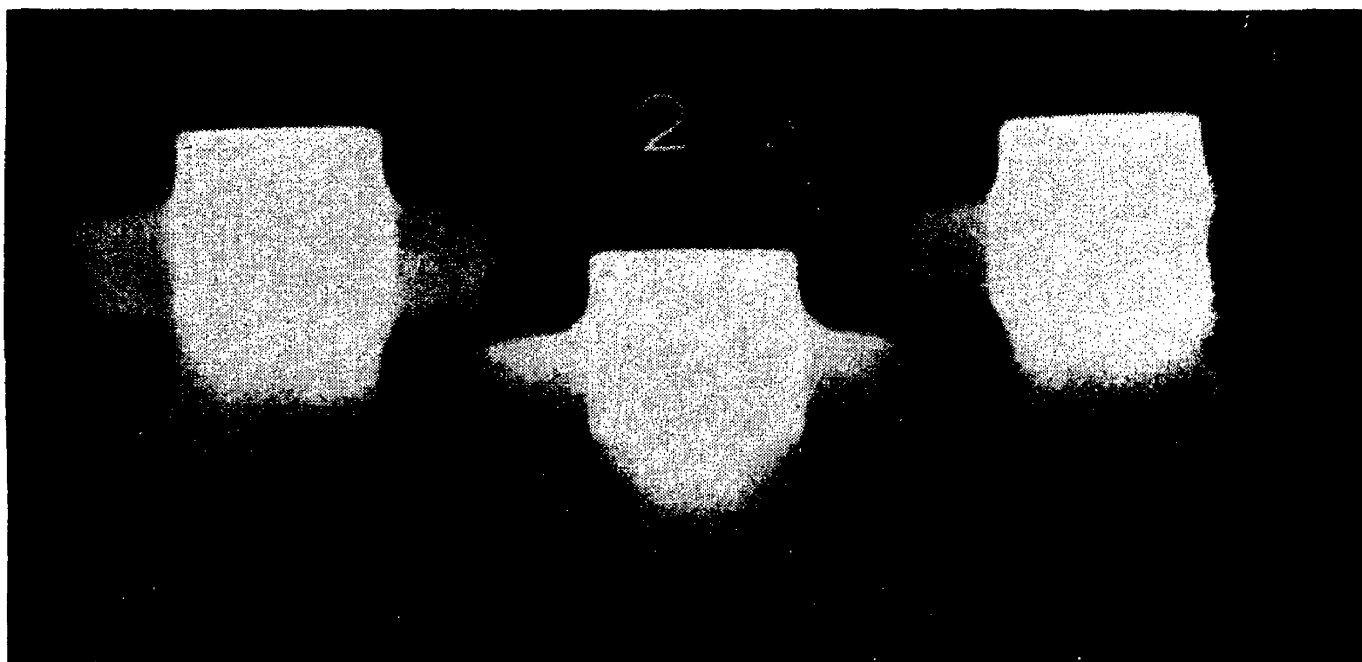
Porosity in cast copper welding electrodes.
